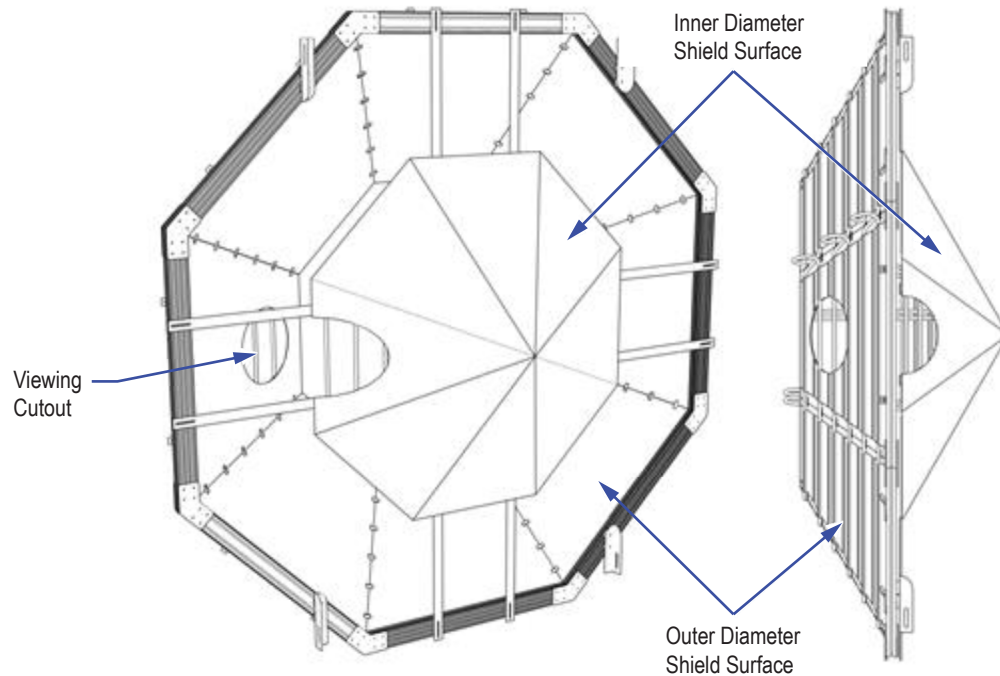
IBD assembly drawings showing inner and outer 'shield' sections.
